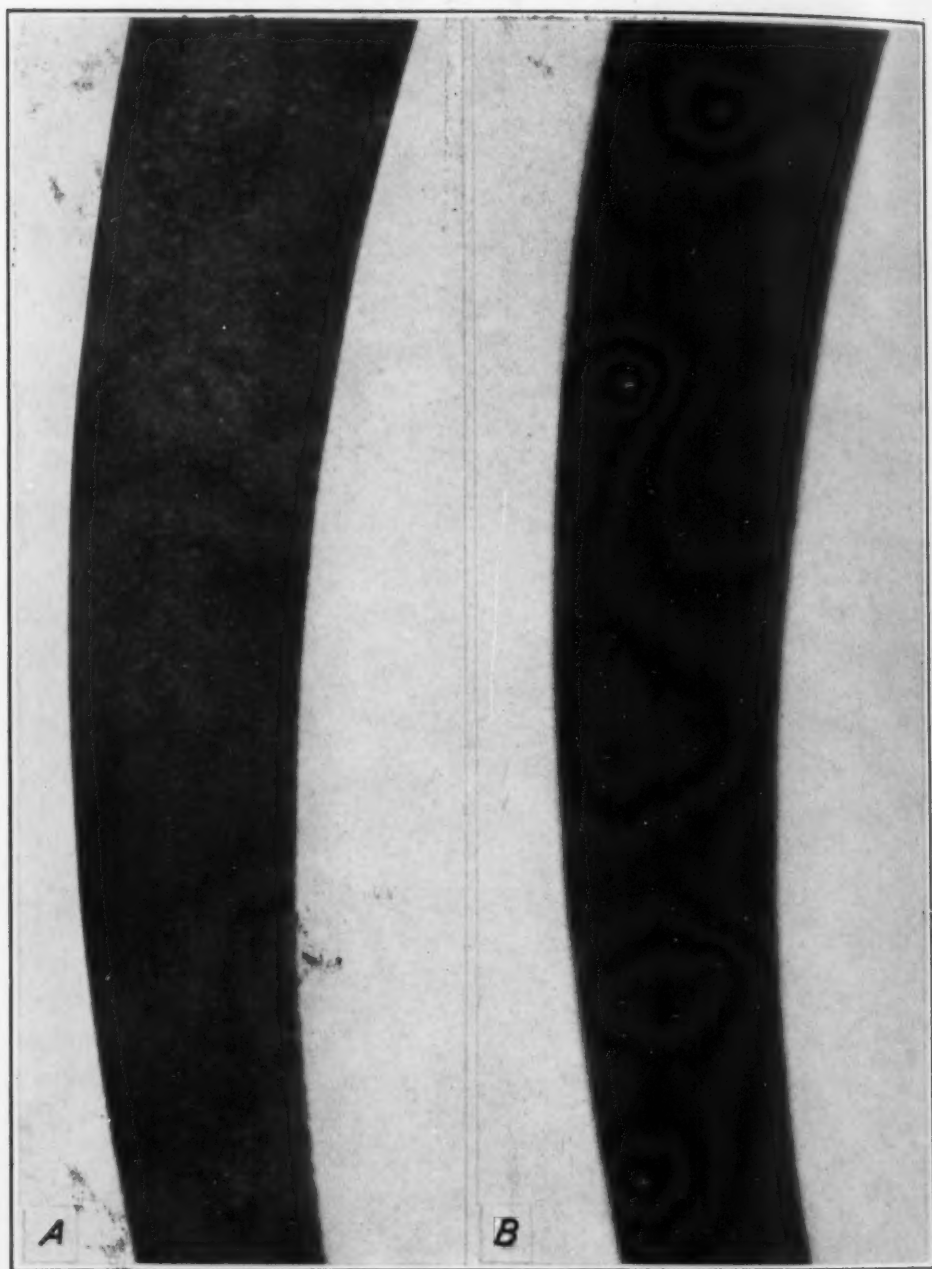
A—Aluminum Alloy Sand-Casting, First Method of Casting.
